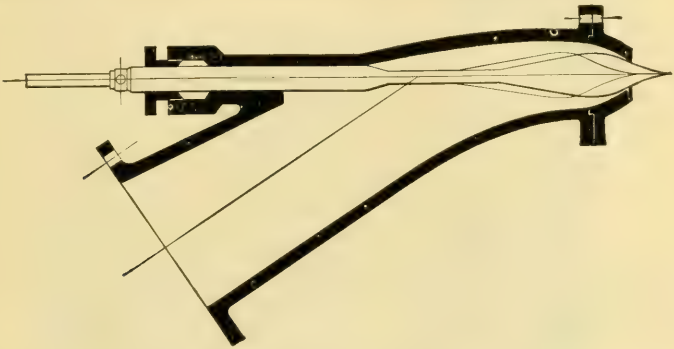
Sectional View of Pelton Needle Nozzle.
